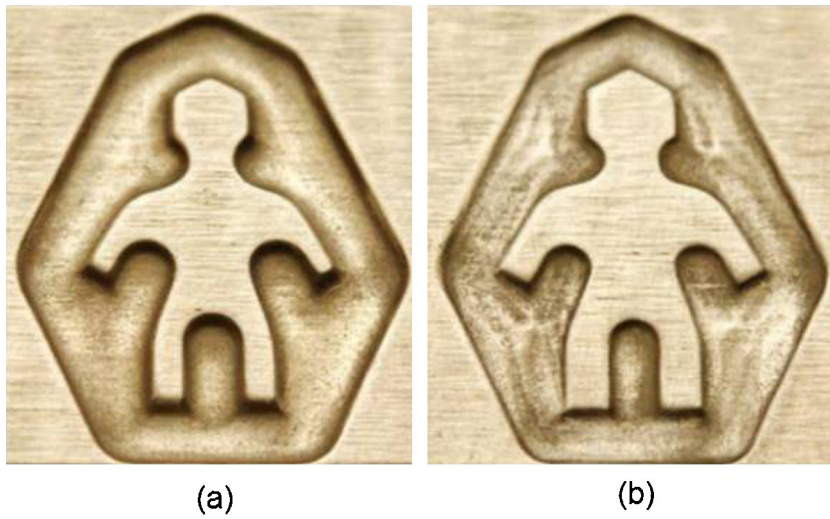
Pockets machined using contour-parallel tool paths and different step-over distances (a) 0.1 mm and (b) 0.3 mm.
